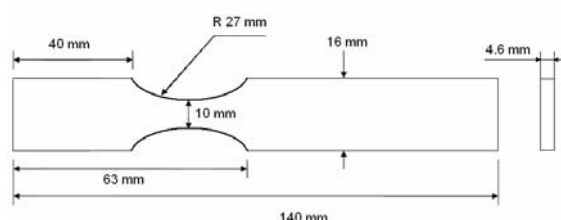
Design drawing of flat specimen for corrosion fatigue tests.
